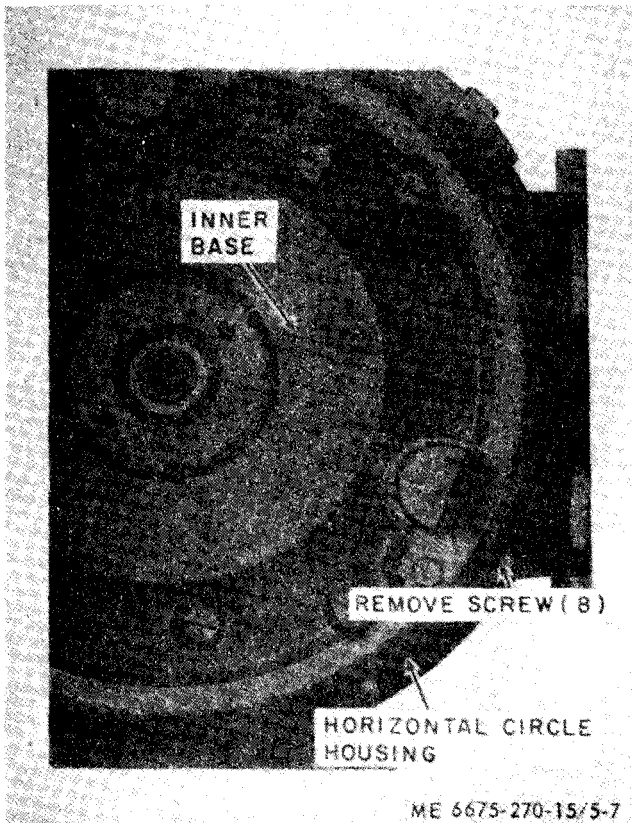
Horizontal circle housing and inner base, removal and installation.
